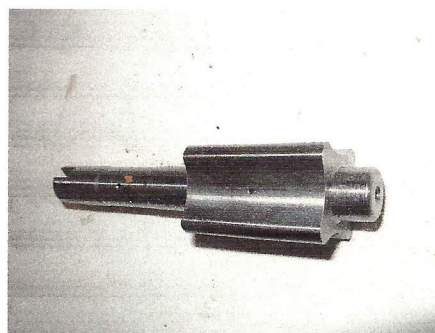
is of the newly designed one piece spindle/rotor assembly. Notice that this part has a stub shaft on the previously unsupported end of the spindle.
